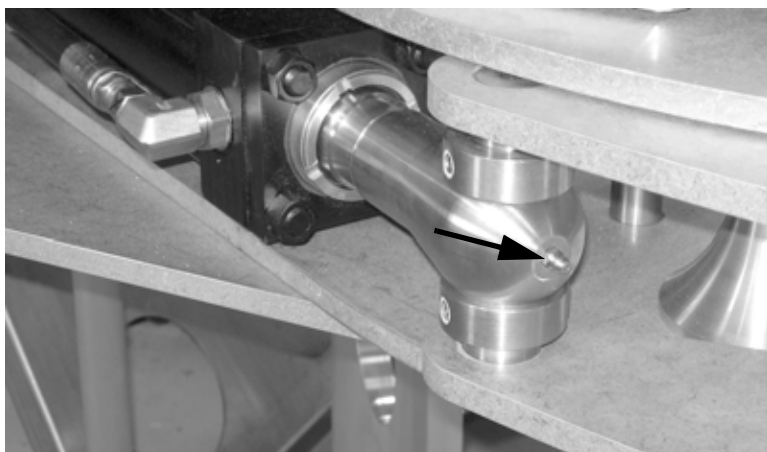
Both clamping cylinders have a grease fitting on the rod end.
